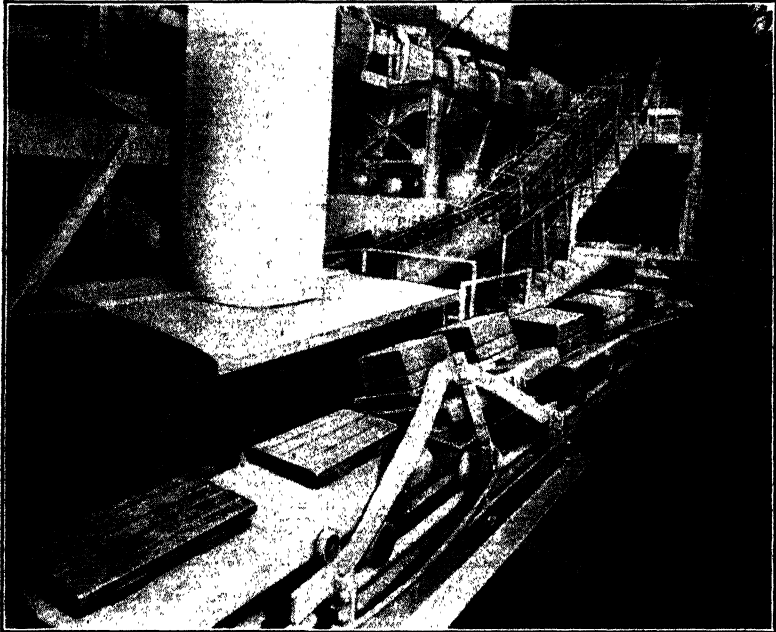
Tilting top, mold conveyor at shake-out, showing a snap mold being dumped on the shake-out. (Courtesy of Link-Belt Co., Chicago, Ill.)
